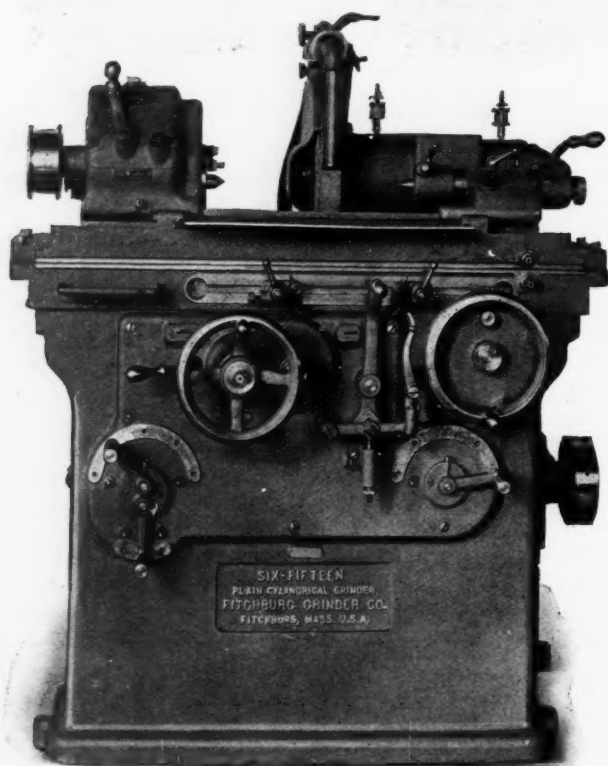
Front View of Fitchburg Style A Plain Grinding Machine
